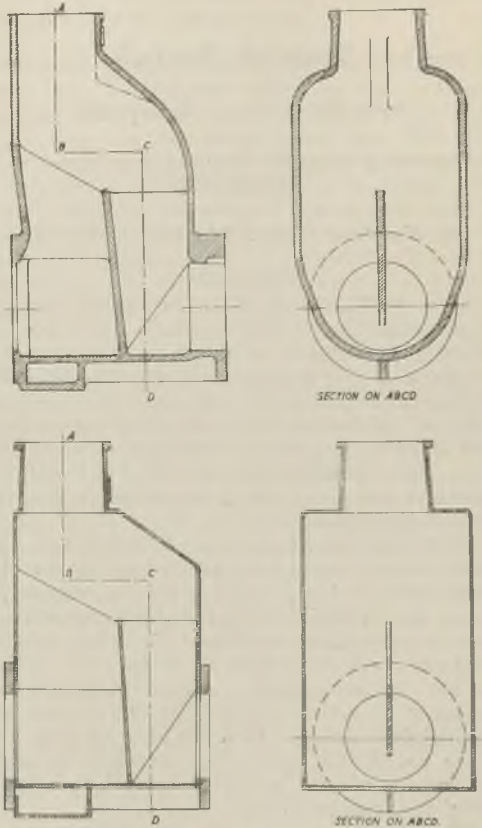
UPPER SKETCH "AS DESIGNED" FOR CAST IRON AND LOWER SKETCH "AS MADE" BY WELDING.
